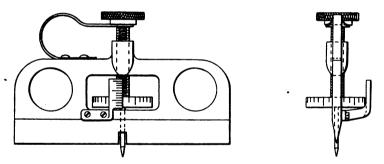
Needle-point micrometer depth-gauge. Scale: full size.
